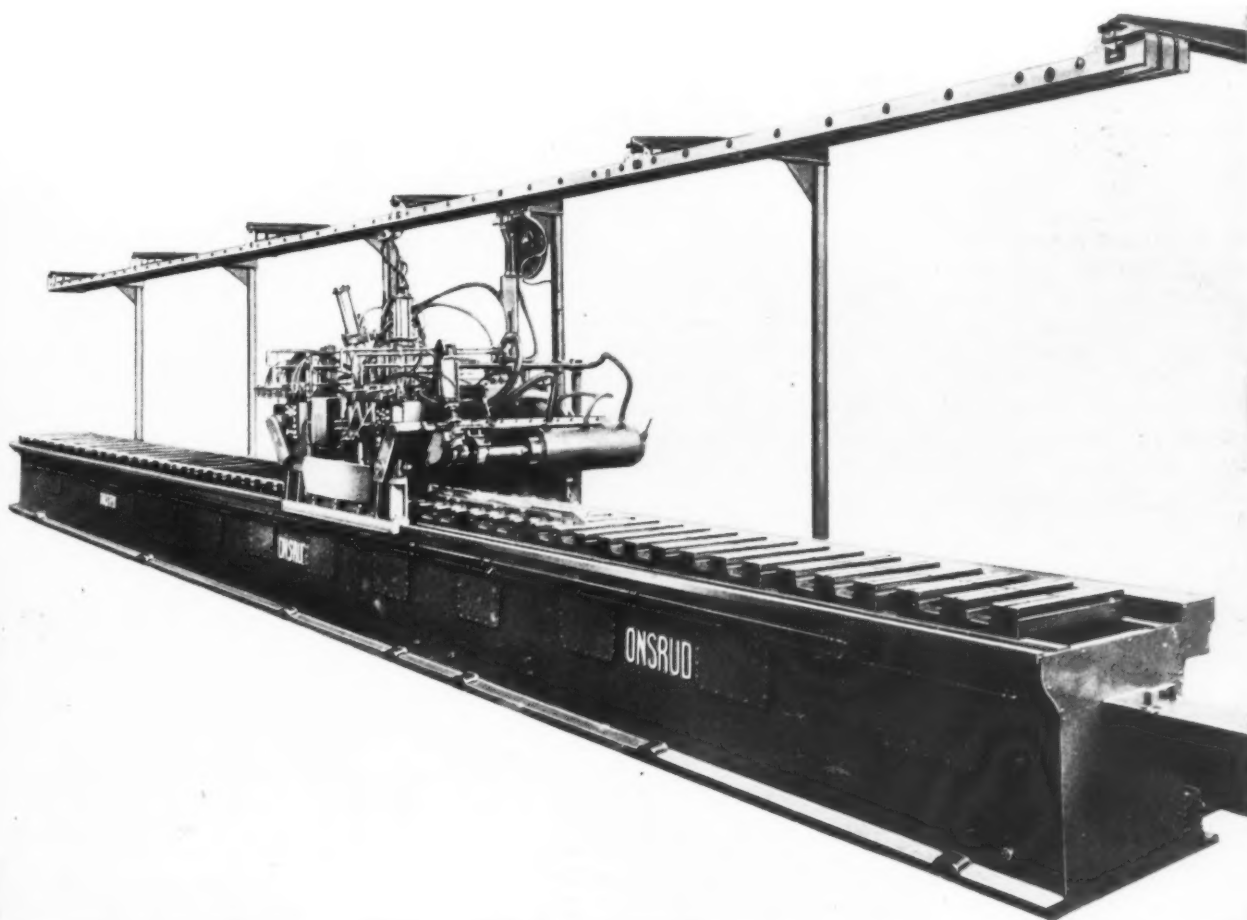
Automatic Contour-milling Machine Designed and Built by the Onsrud Machine Works, Inc.
